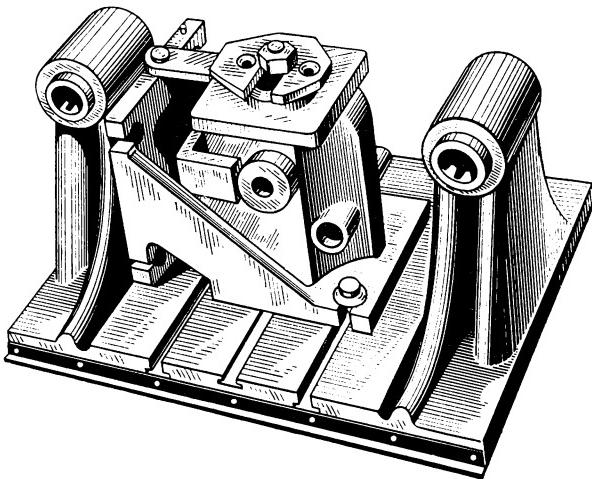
A workpiece clamped in a holder mounted on the pallet
